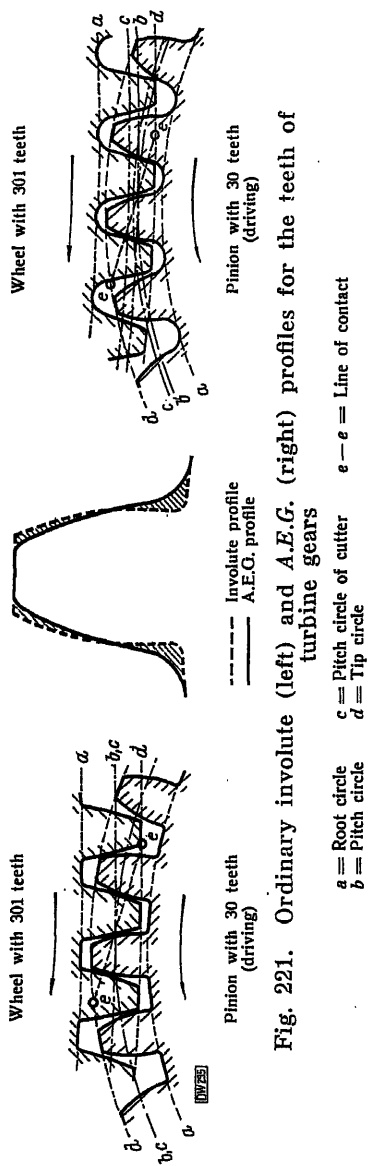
Ordinary involute (left) and A.E.G. (right) profiles for the teeth of turbine gears
